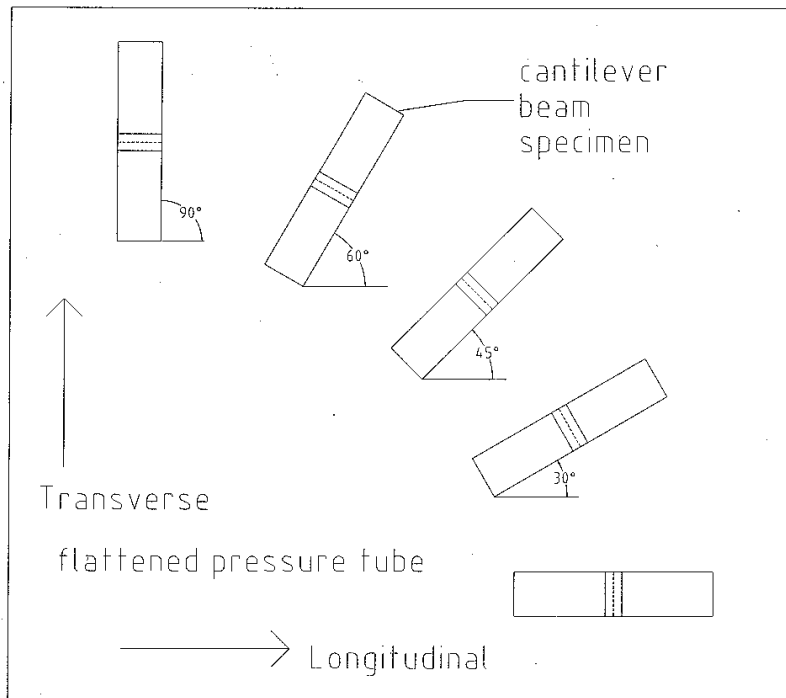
Schematic illustration of machining of cantilever beam specimen.
